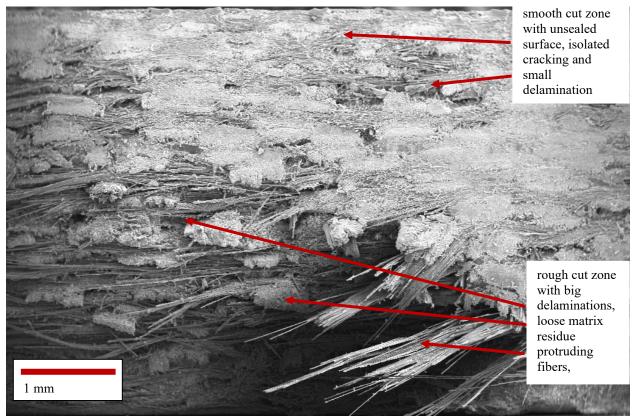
Surface of a preliminary test specimen cut with low punch speed
